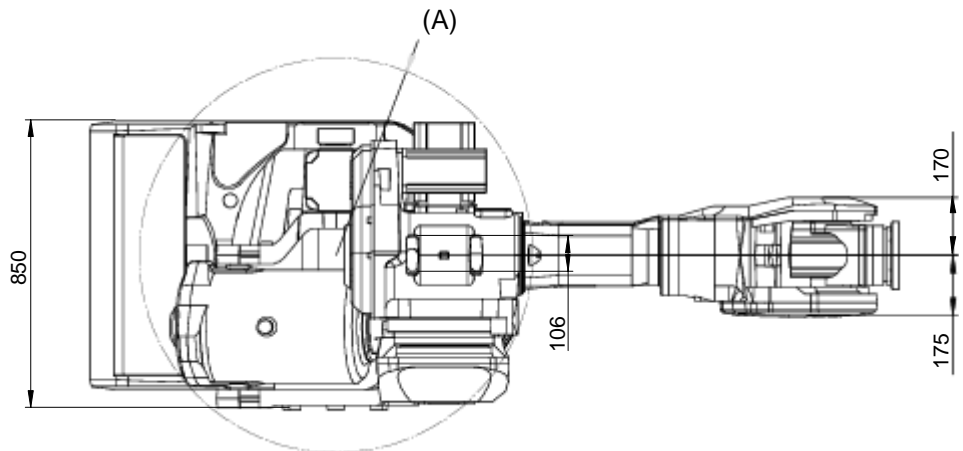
Holes for mounting of extra load on the upper arm on IRB 6600/6650 (dimensions in mm).
